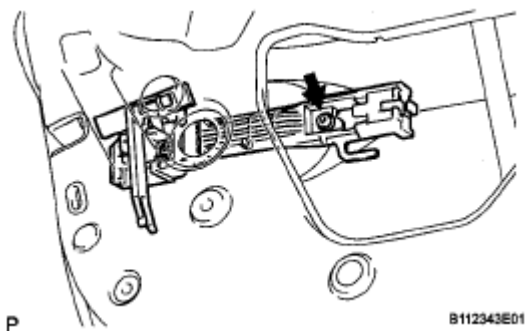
Locating Rear Door Outside Handle Frame Sub-Assembly Screw
